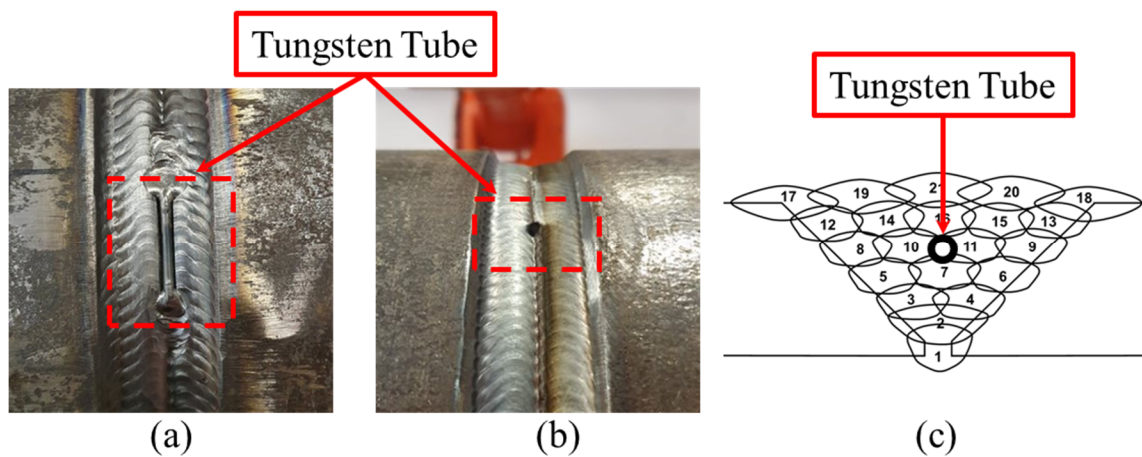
Images showing (a) embedding of a tungsten pipe within machined groove and tack welded in place, (b) an embedded tungsten pipe covered by subsequent weld passes and (c) the relative position of tungsten defect within the completed pass structure
